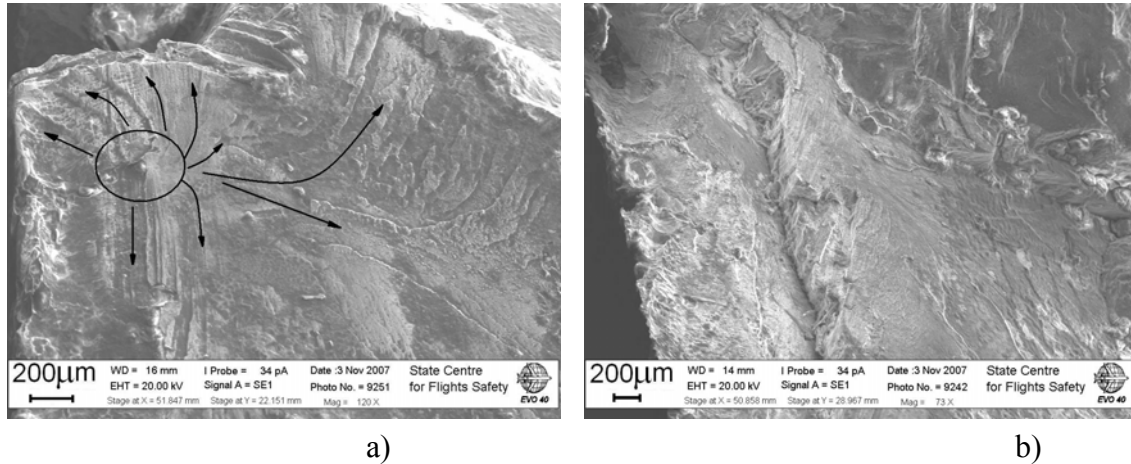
General view (a) of fracture relief in the secondary origin (indicated by circle) of fatigue fracture under the blade suction side surface and (b) extended segments of quasi-cleavage of dendrite body on various fracture segments.
